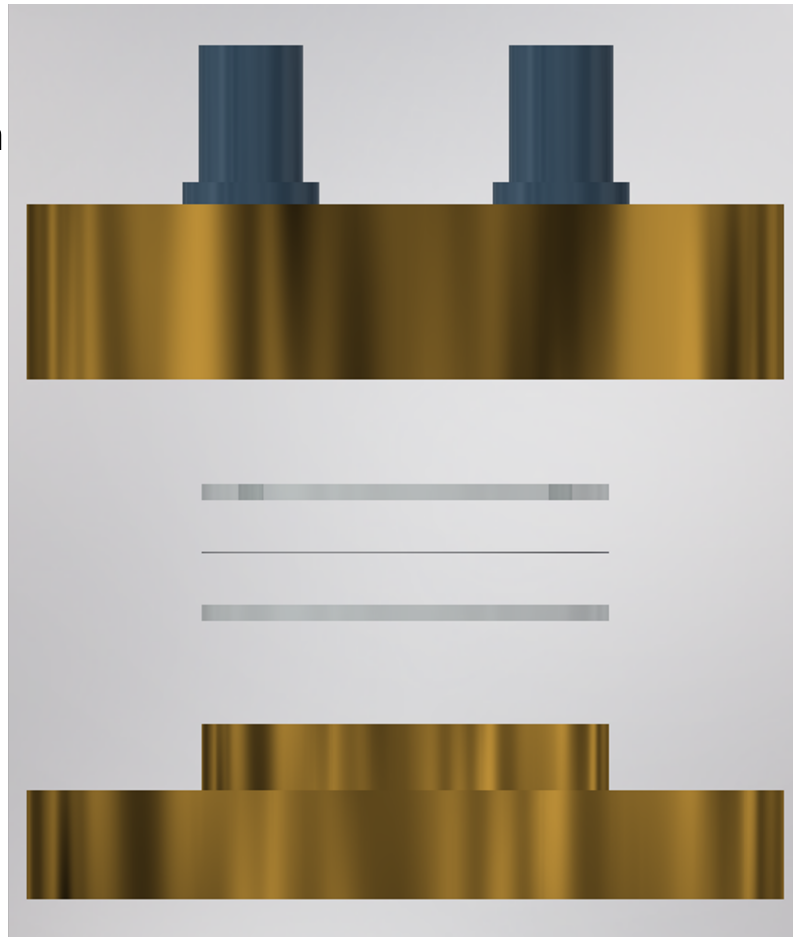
Design of the machined brass flow cell. (a) Nanoport assemblies for internal tubing connection (N-333, IDEX, USA), (b) Brass flange with opening for nanoport, and through holes for 8-32 screws (c) 1 mm thick, 25 mm  $\varnothing$  drilled  $\text{CaF}_2$  window with 1.5 mm  $\varnothing$  two holes 19 mm apart, (d) Mixer - either photoresist film or 3M 30  $\mu\text{m}$  double sided sticky tape, (e) 1 mm thick, 25 mm  $\varnothing$   $\text{CaF}_2$  window (f) Bottom brass flange with tapped holes for 8-32 screws.
